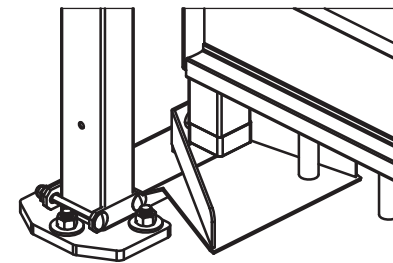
B - MAIN BEAM ROLLER SET
